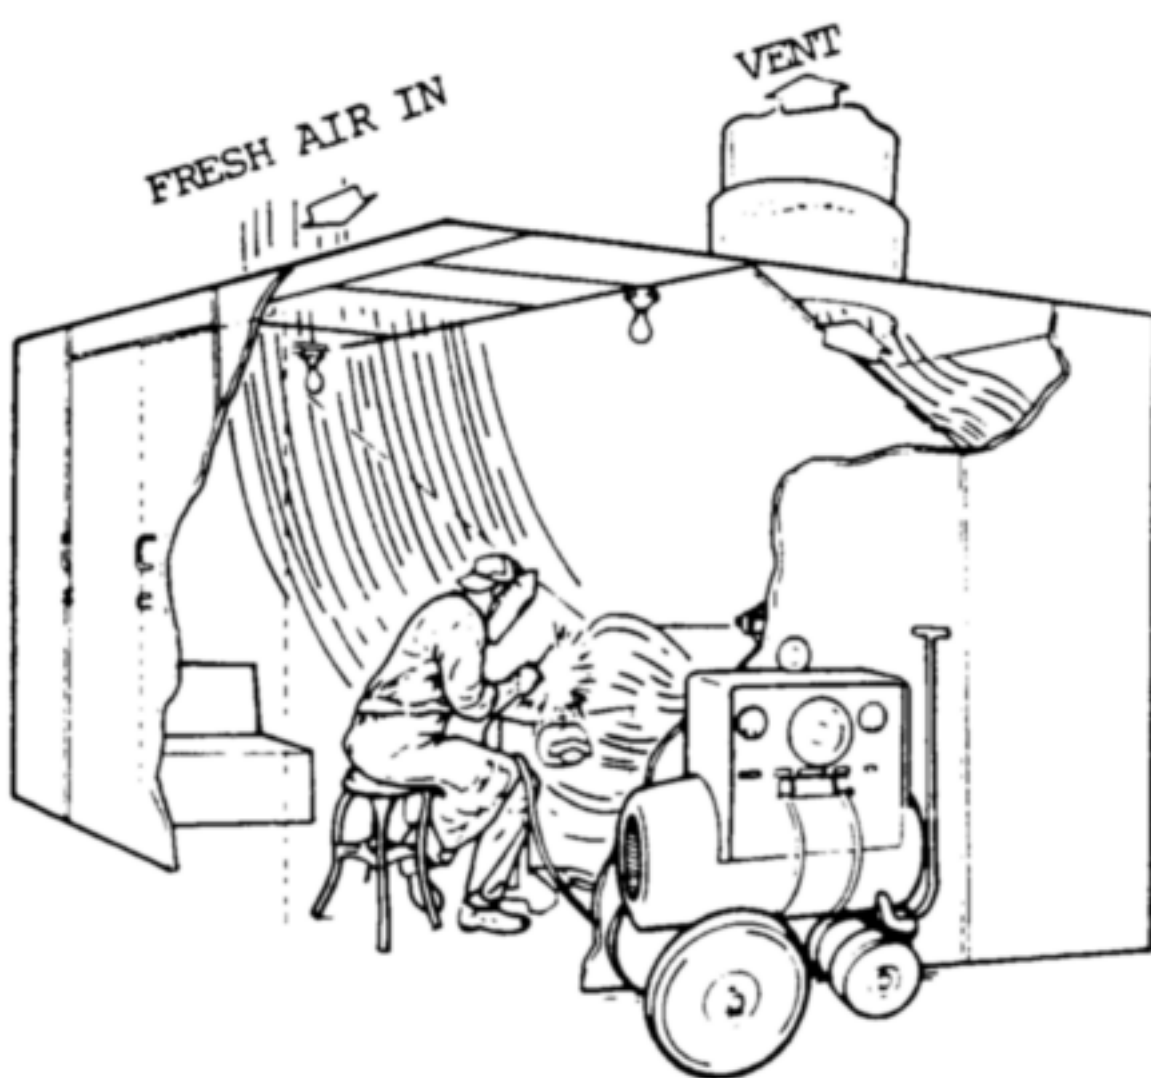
Welding booth with mechanical ventilation.
